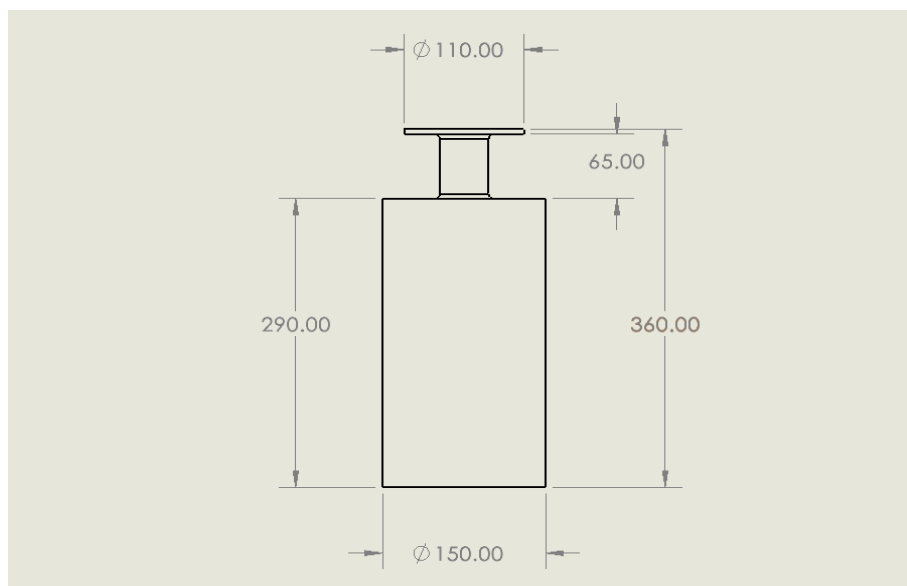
Dimensions of CAD model of Plain Bucket (Side View)
